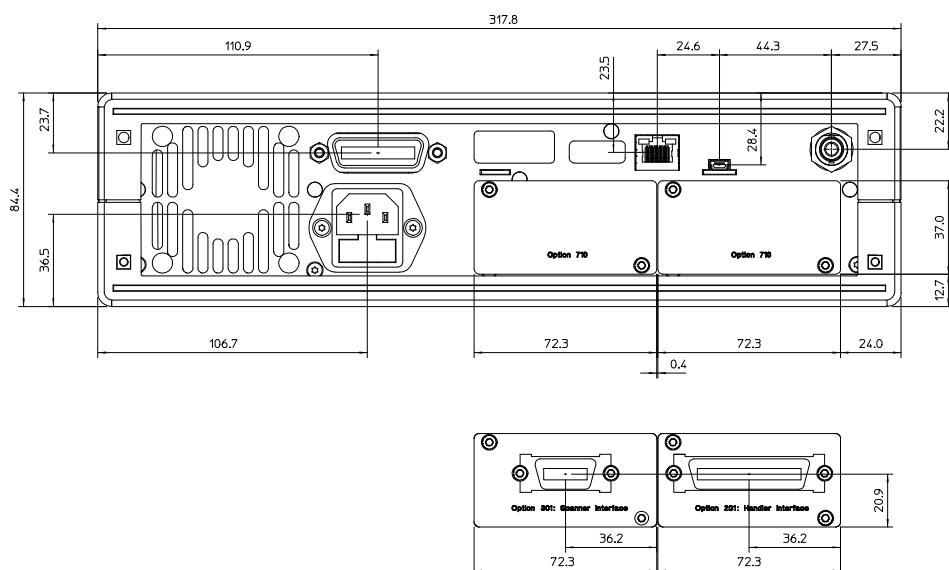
Dimensions (rear view, with handle and bumper, in millimeters, nominal)
